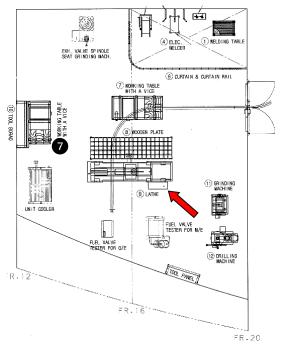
Extract of a plan showing MV Dogan's engine-room workshop arrangement
